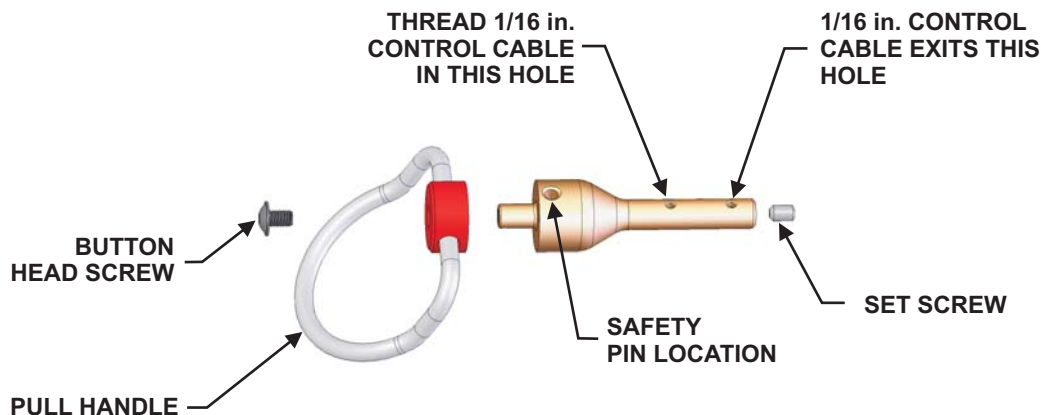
Remote Manual Release Pull Station Handle Assembly
